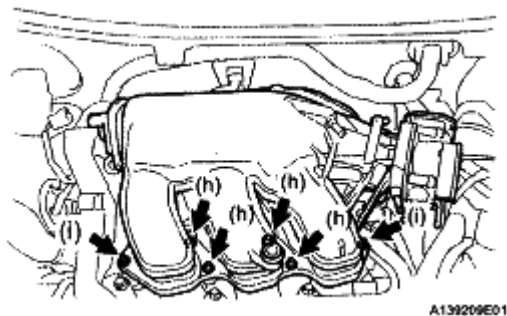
Identifying Intake Air Surge Tank Bolts & Nuts
